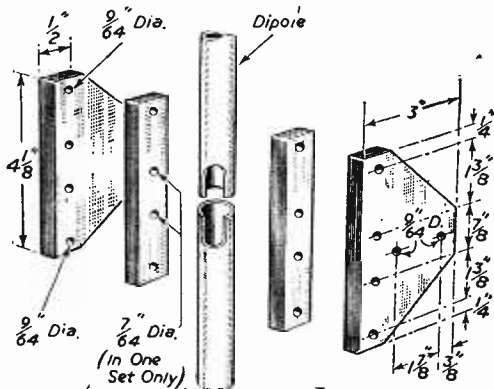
Essential details of the clamp. Two sets of these are required.
